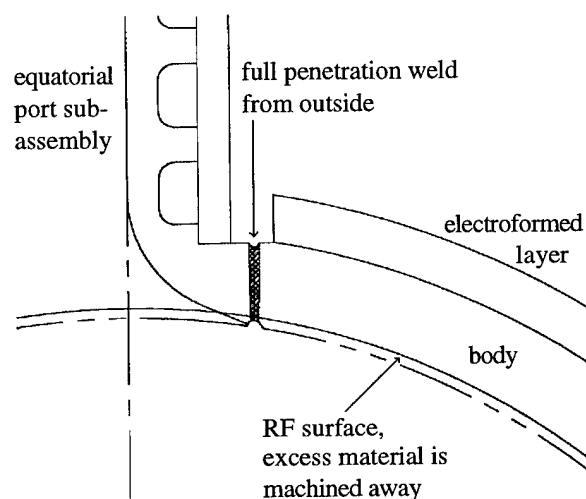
Equatorial port electron beam weld joint. Weld is full penetration from the outside, about 2 mm is removed from the inside during final machining.
